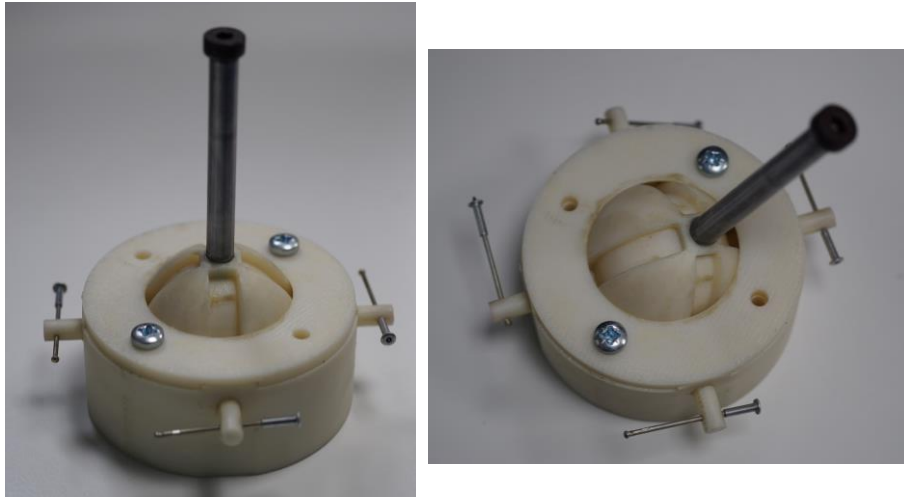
Joint prototype ($R=30mm$; $r=12,67mm$)
